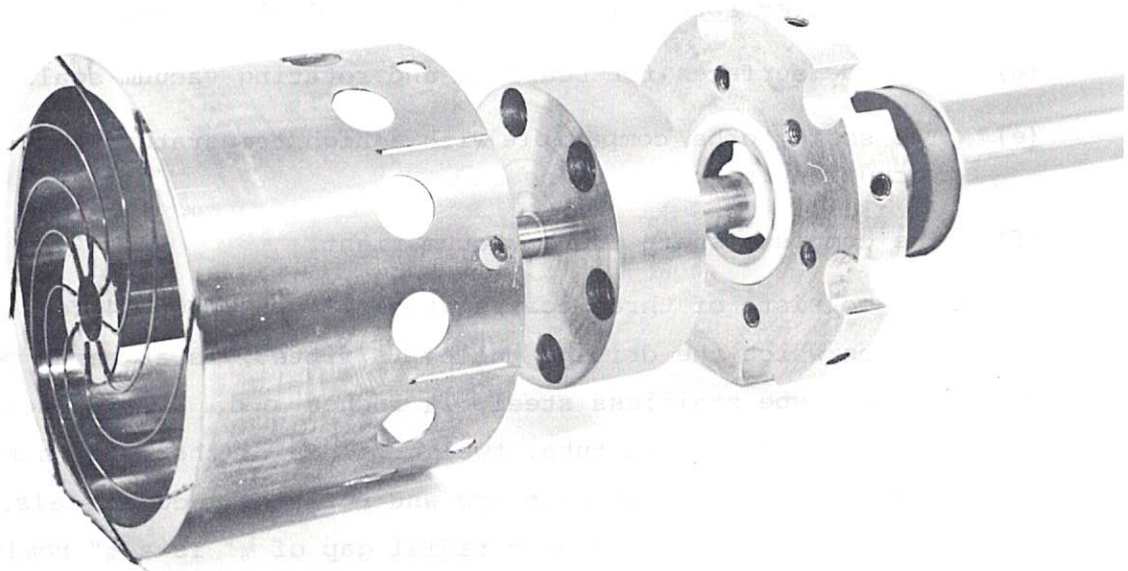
'Hot end' of the rotating torque shaft showing the water cooled filament blocks and coaxial tube assembly.
